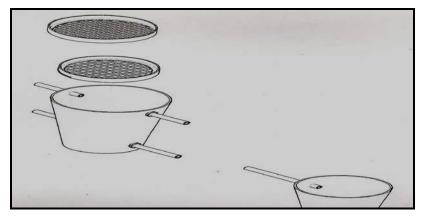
Assembly drawing showing the arrangement of filter elements of the plant
